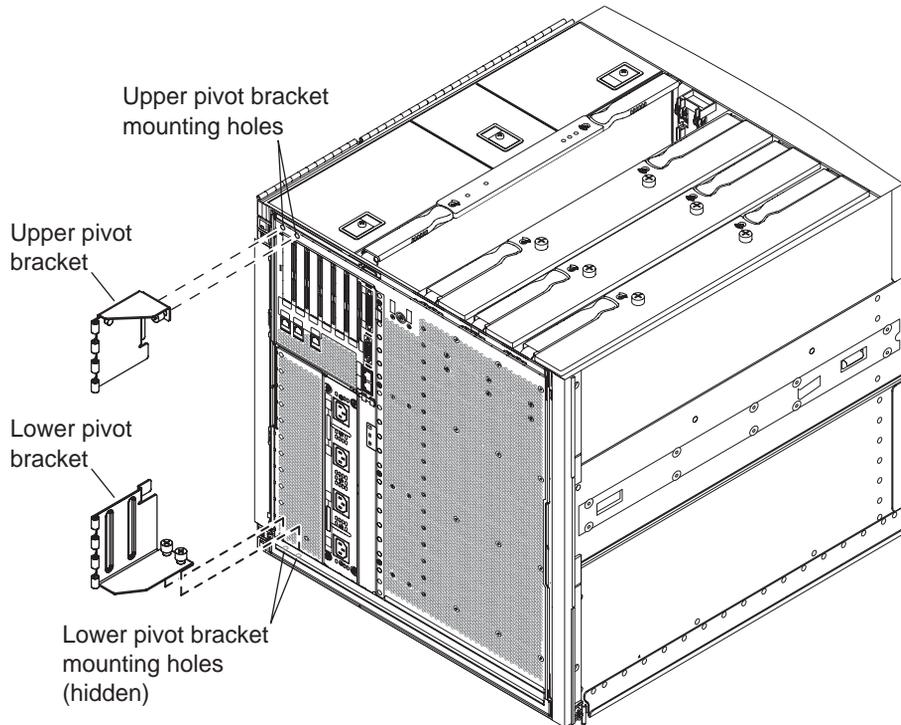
Upper and Lower Pivot Bracket Mounting Holes
